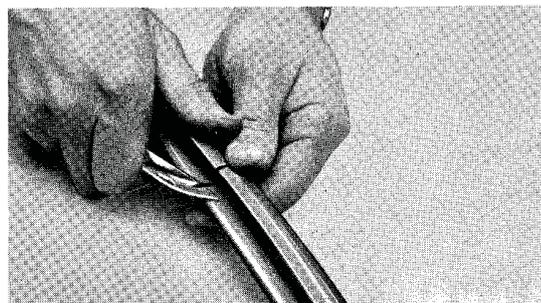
shows the start of the welding process: The surface areas to be joined are pressed against the hot welding blade until the material visibly begins to go soft.
